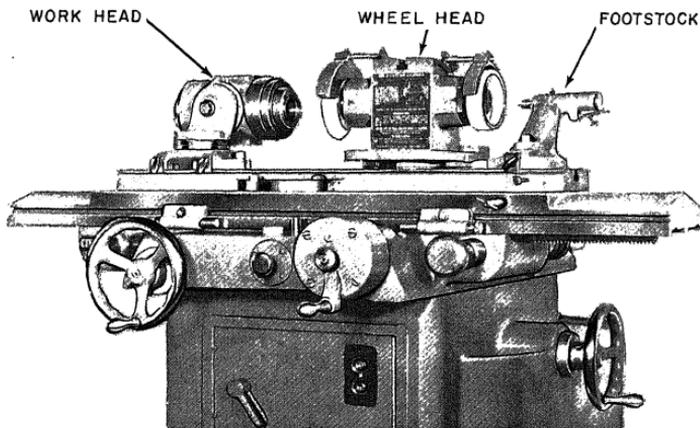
Tool and cutter grinder (workhead and footstock).
